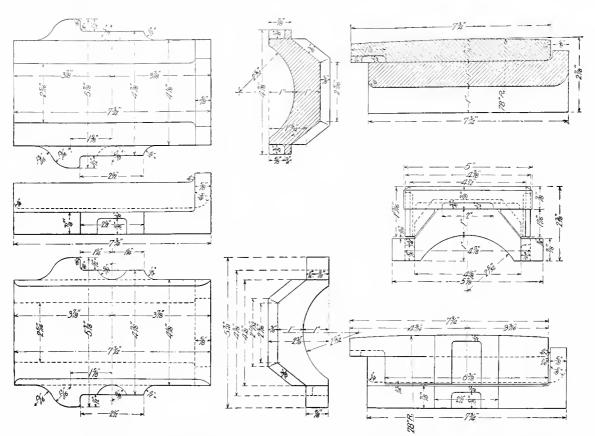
Standard Journal Box for Journal, 4¼ in. x 8 in. Sheet 5.
